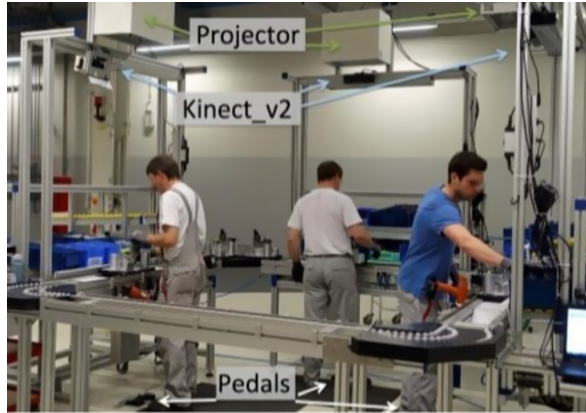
AR assembly line equipped with PDs (source: [27]).
